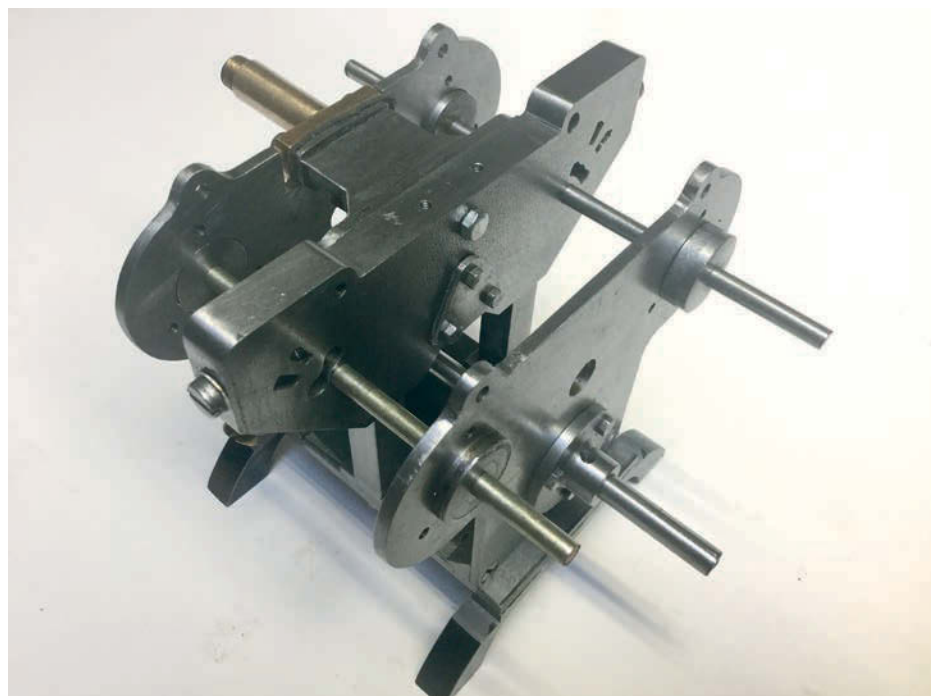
Bearing alignment using a dummy shaft. The two rods in the central port block align the cylinder trunnion bearings. When the end plate bolts are tightened into the base the shaft should rotate freely.
